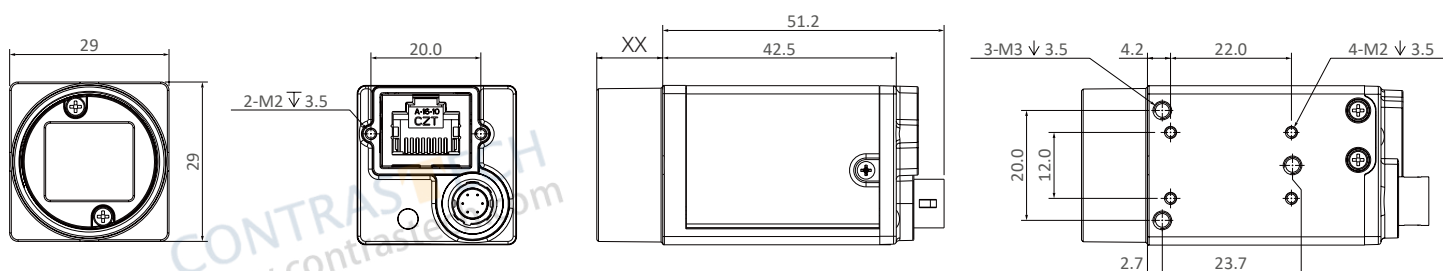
Mechanical Dimensions (in mm) for GigE Cameras with 29 \* 29 \* 42mm flat housing.
